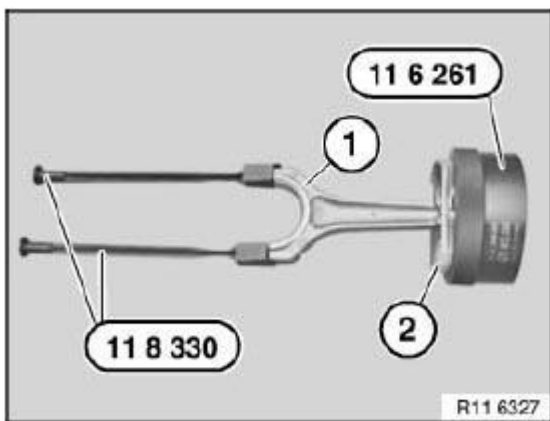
Connecting Rod, Piston And Special Tools (11 8 330) And (11 6 261)
